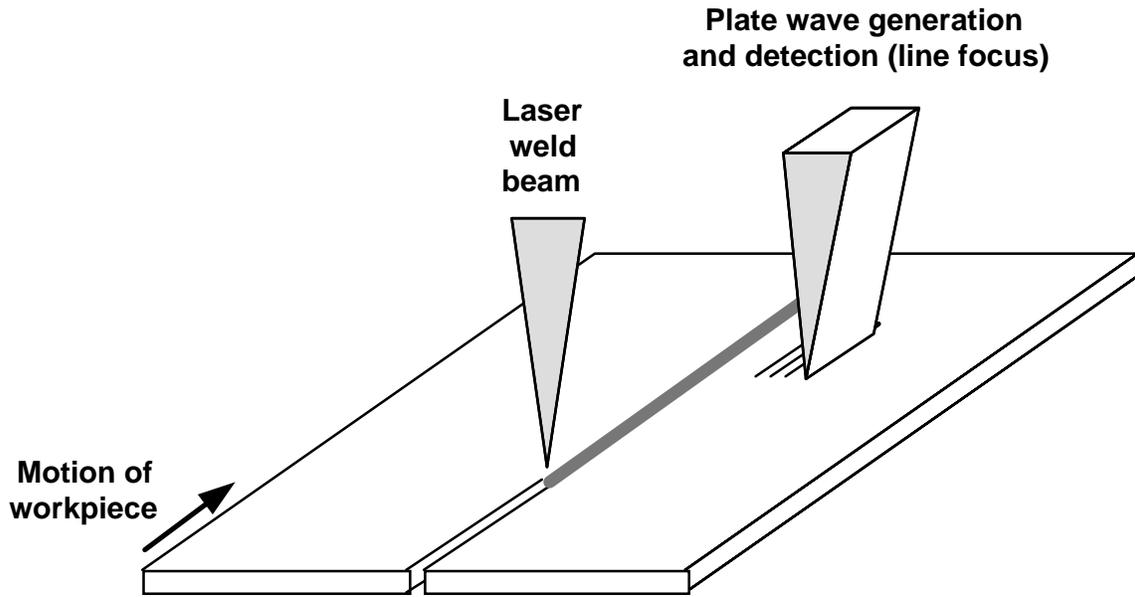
Schematic diagram of weld inspection geometry using reflected plate waves. The gap between the sheet metal panels is exaggerated.
